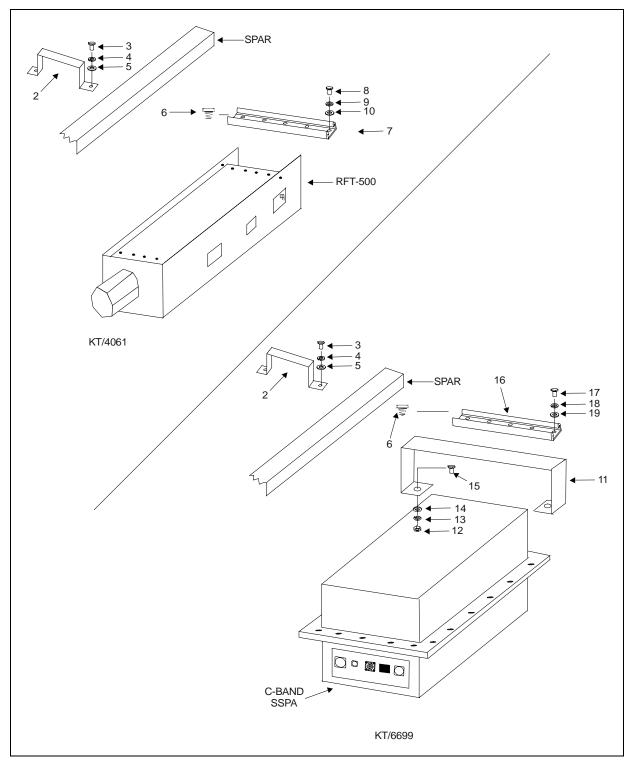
Exploded View of Spar Mounting Kit (Single Thread Configuration)
